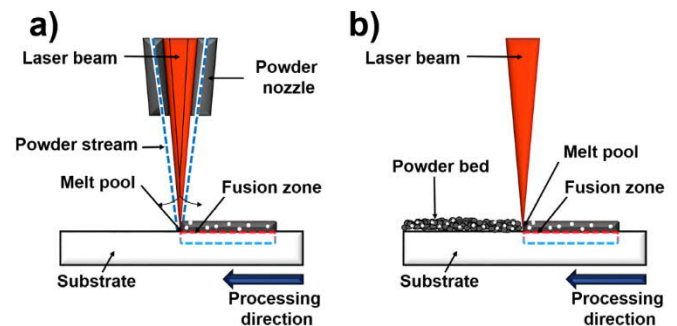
Representative scheme of the (a) DED and (b) L-PBF laser additive manufacturing technologies.
